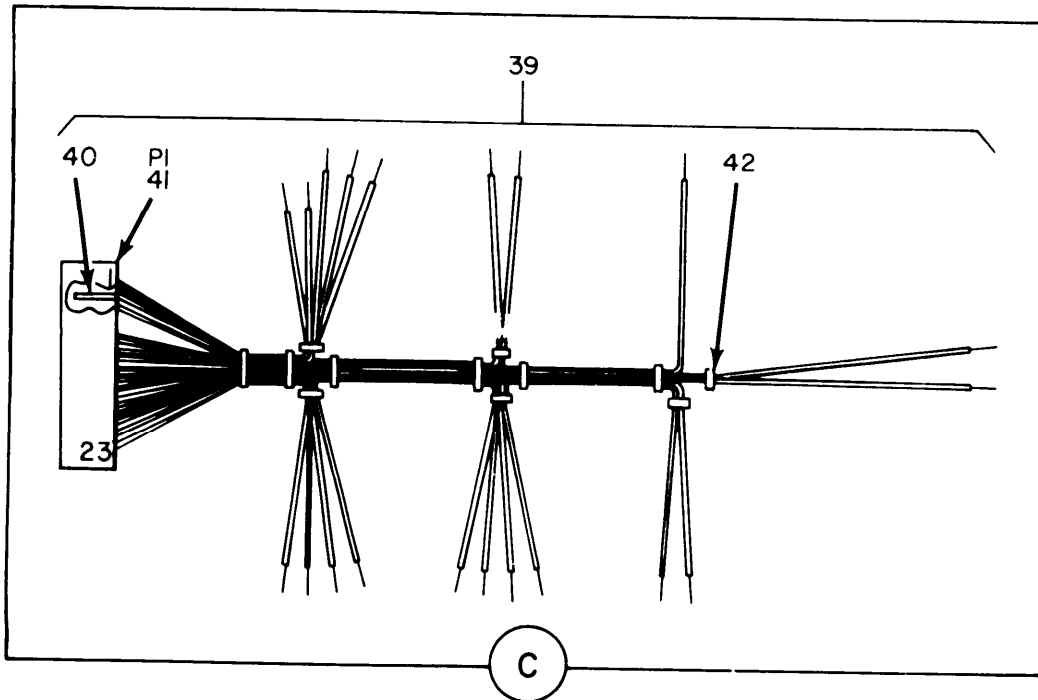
Panel Assembly, Test Set (Sheet 1 of 2).
